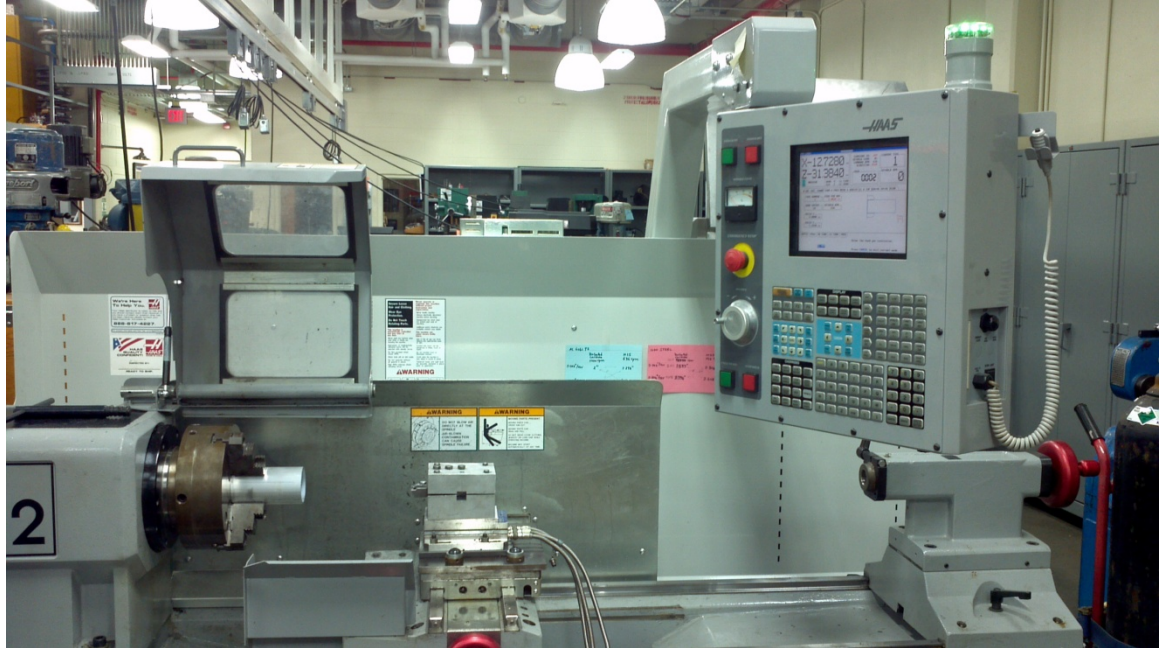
Dynamometer and modified tool post mounted on the HAAS lathe (TL2)
